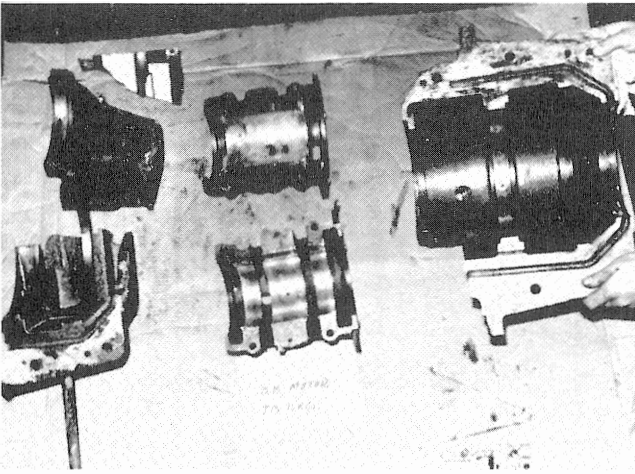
Part of Lower Bearing Housing at Left and Upper Housing at Right. Note Minimum Babbitt Damage from Radial Loads, but Severe Axial Shear Damage to the Bearing Shoulder.
